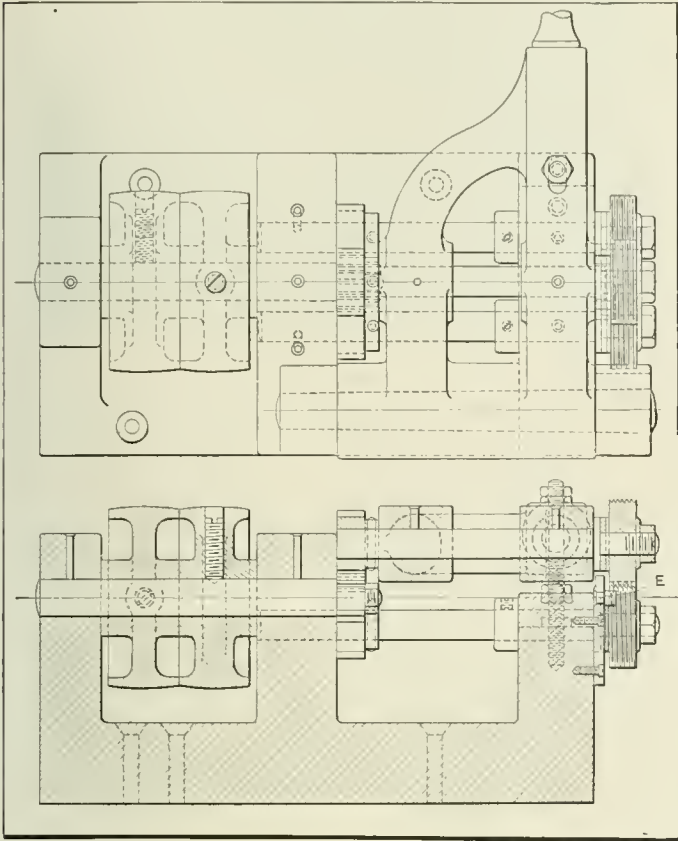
A Thread-rolling Machine by Means of which 1000 Washers can be threaded in an Hour
